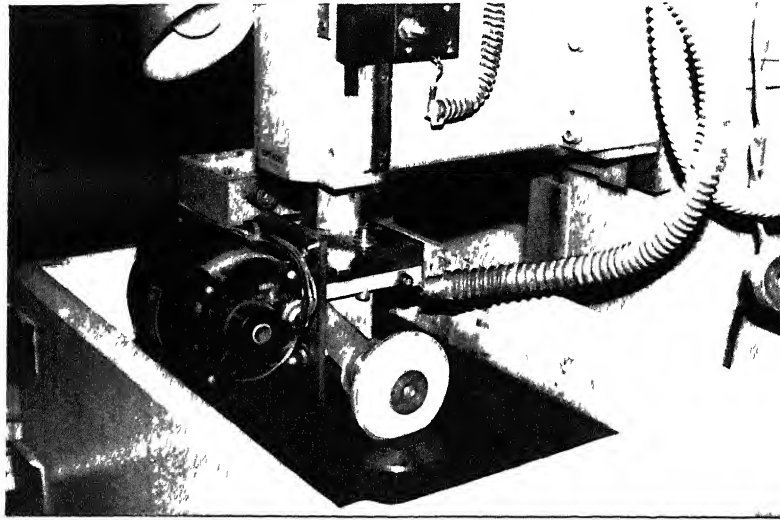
1 Photograph depicting the grinding attachment mounted on the ram of the EDM machine
